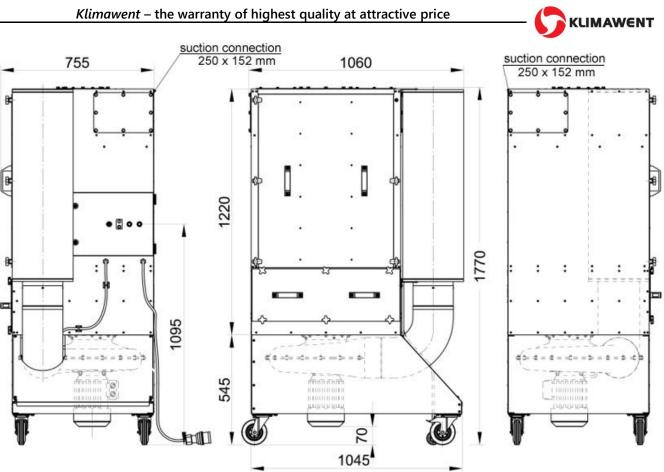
HARD-2000-S - Dimensions, layout of connections
